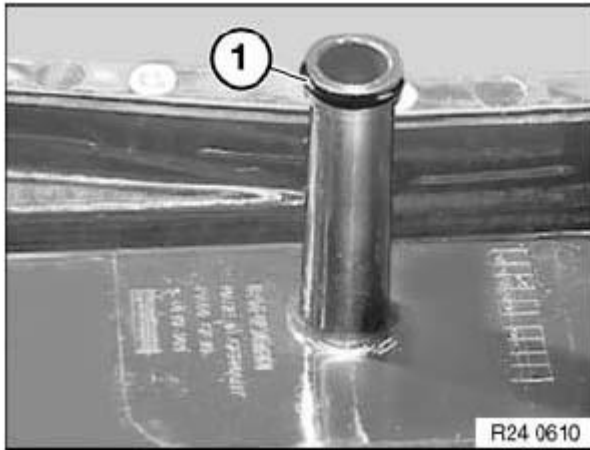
Identifying Sealing Ring On Oil Filter Tube
